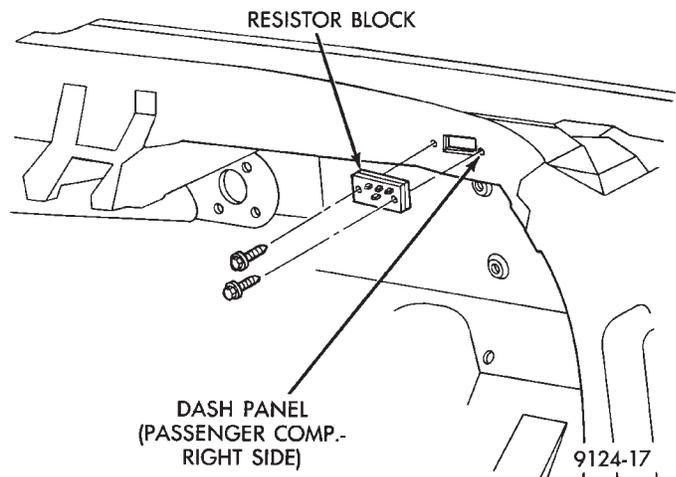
Blower Resistor Block Location—AJ and AG Body
